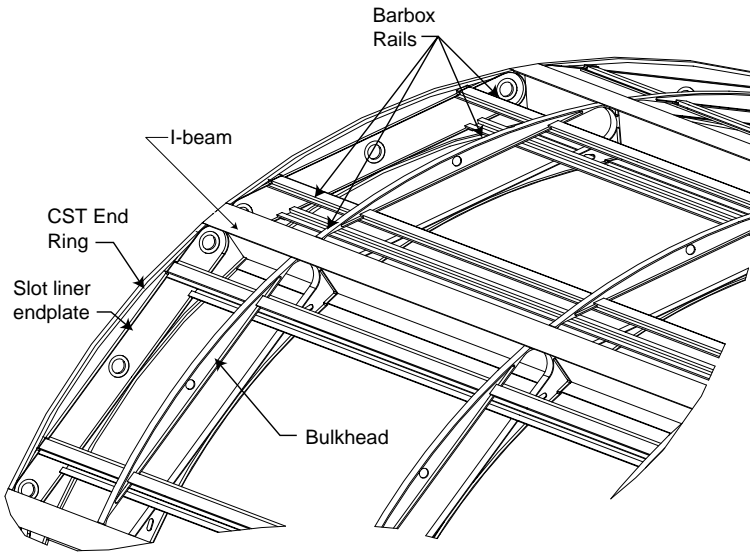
Details of the CST assembly near the end opposite the transition flange. The inner and outer skins have been removed, as well as the four pieces of stainless steel sheet metal that form the slotliners when bolted to the rails. The rails and slot liners extend all the way through the transition flange.
